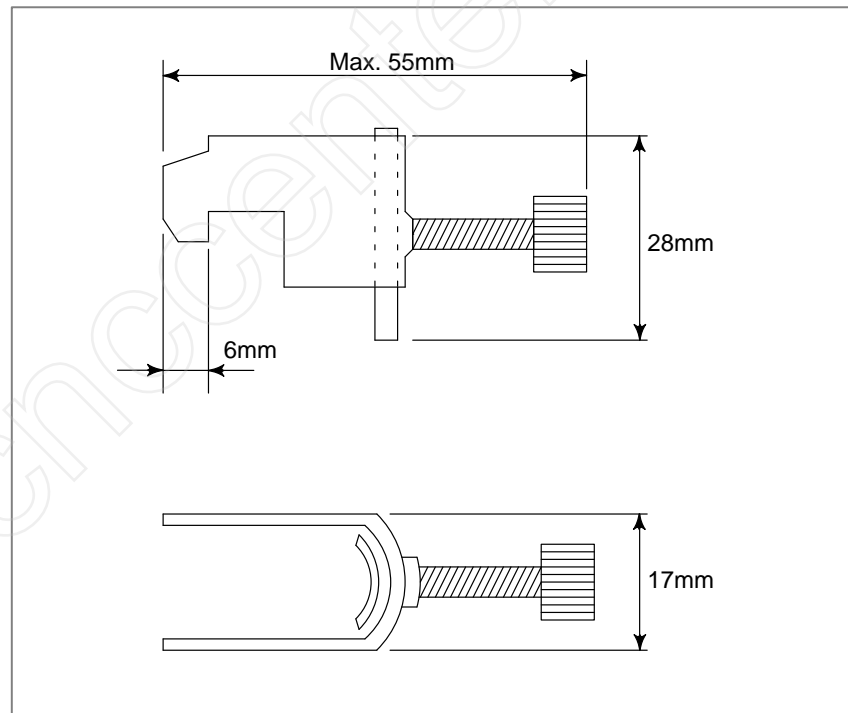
(e) Outer drawings of metal fittings for clamp
